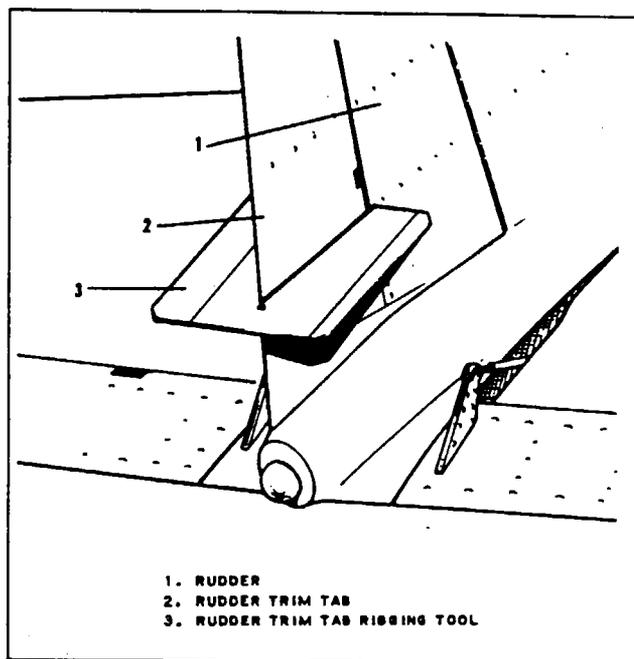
Installation of Rudder Trim Rigging Tool
